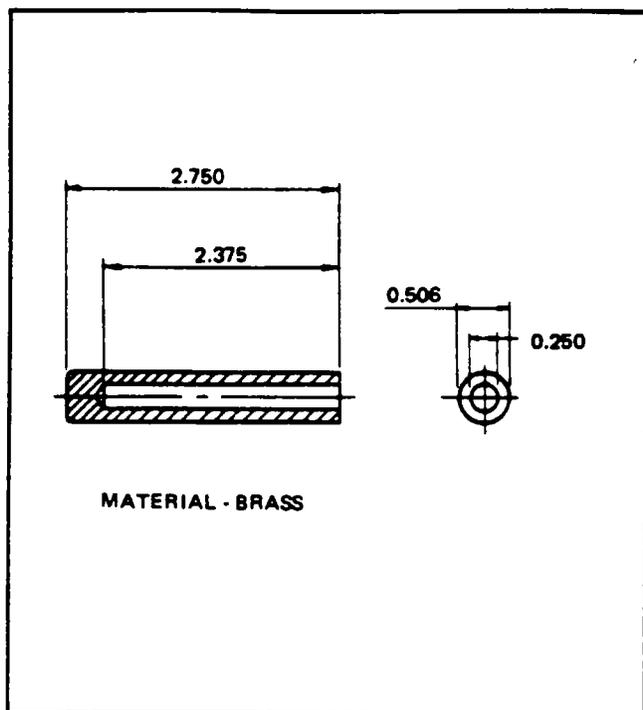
Ignition Harness Ferrule Seating Tool 11-7074
